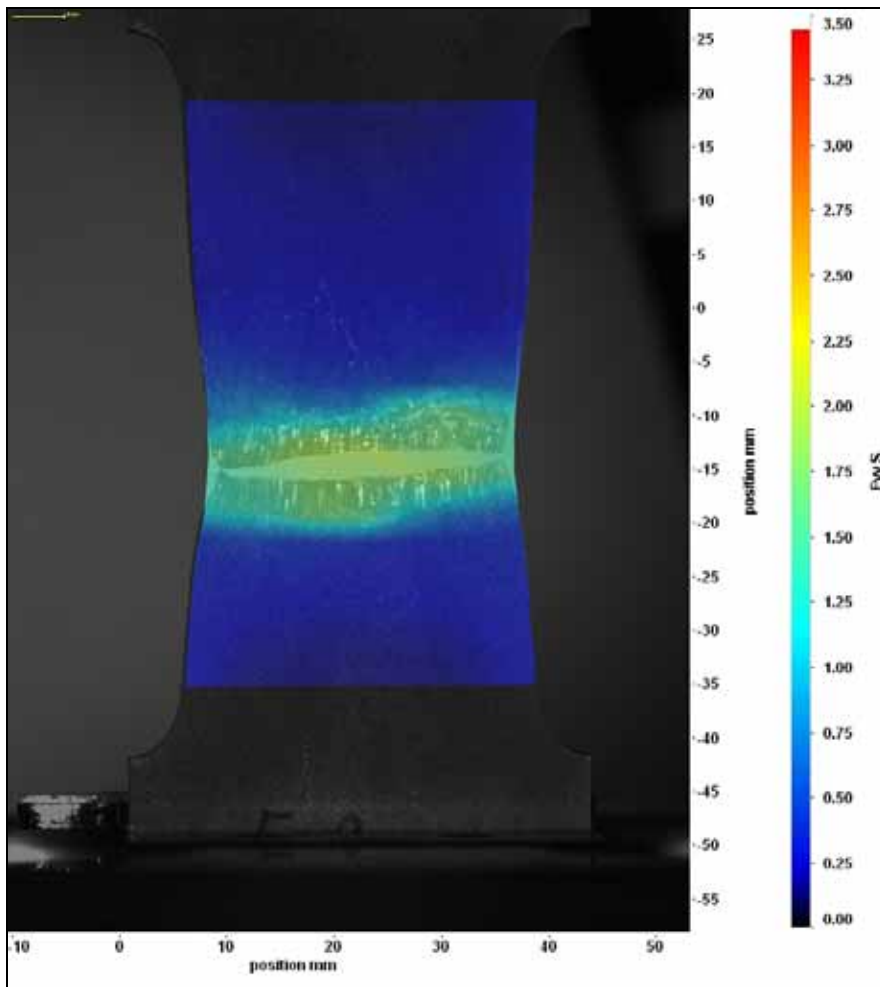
Strain map of an EB weld which fractured at the HAZ. Tube material is on the top and lid material on the bottom. Deformation localizes to the HAZ. It can also be seen that the extruded tube material is elongated much more than the forged lid material.
